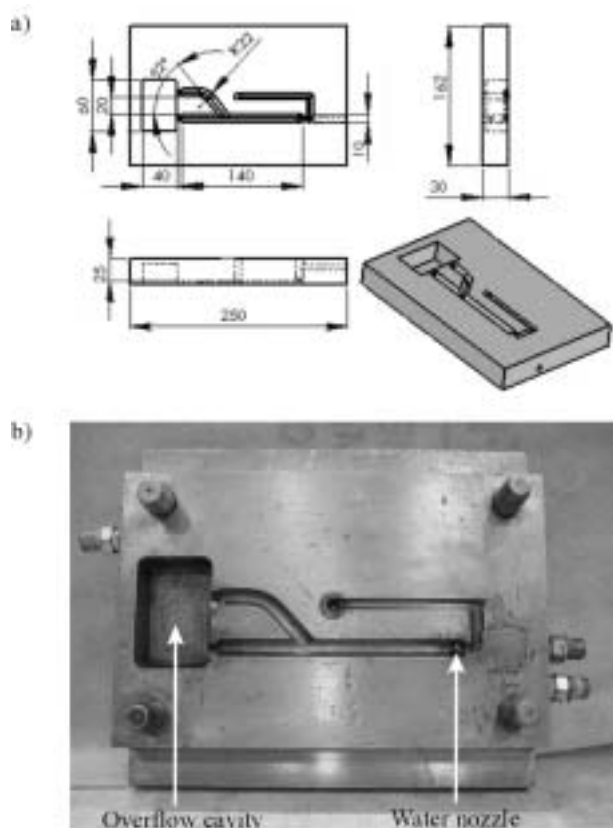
Manufactured mold used in the experiments: a) layout of the mold cavity, b) the manufactured mold
